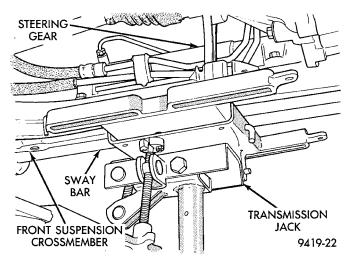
Supporting Front Suspension Crossmember attaching front suspension crossmember and lower control arm to body of vehicle. Lower front suspension crossmember while loosening rear bolts, but do not remove rear bolts from crossmember.
